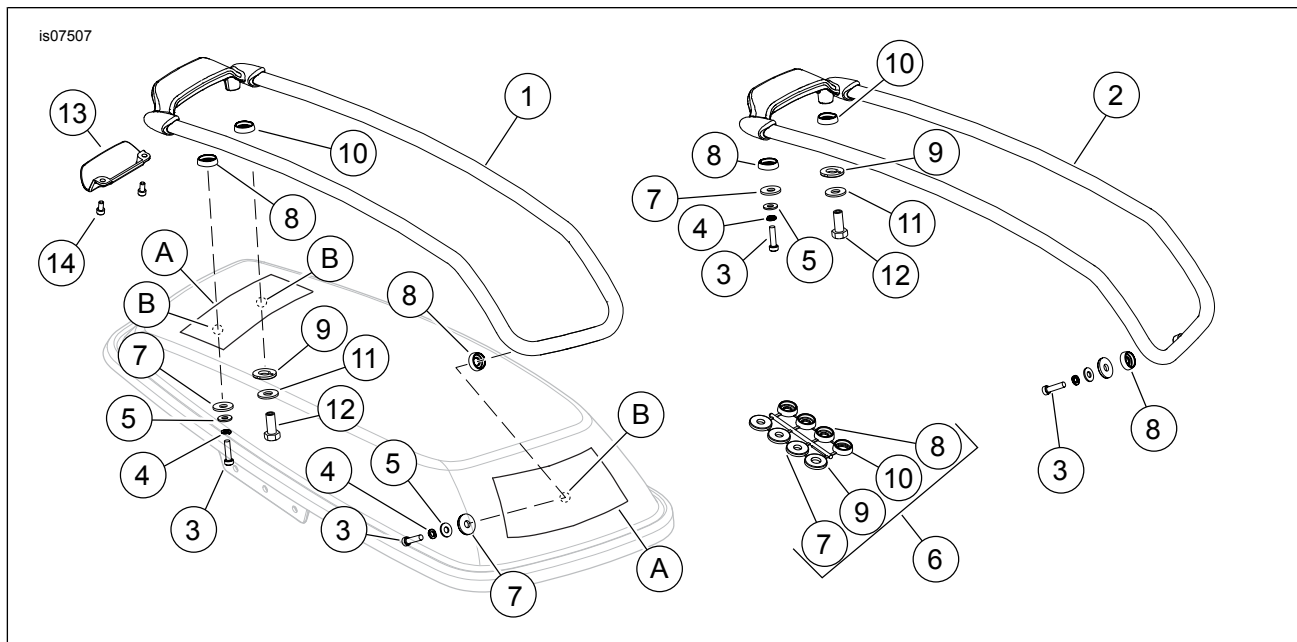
Service Parts: Air Wing Saddlebag Rail Kit
